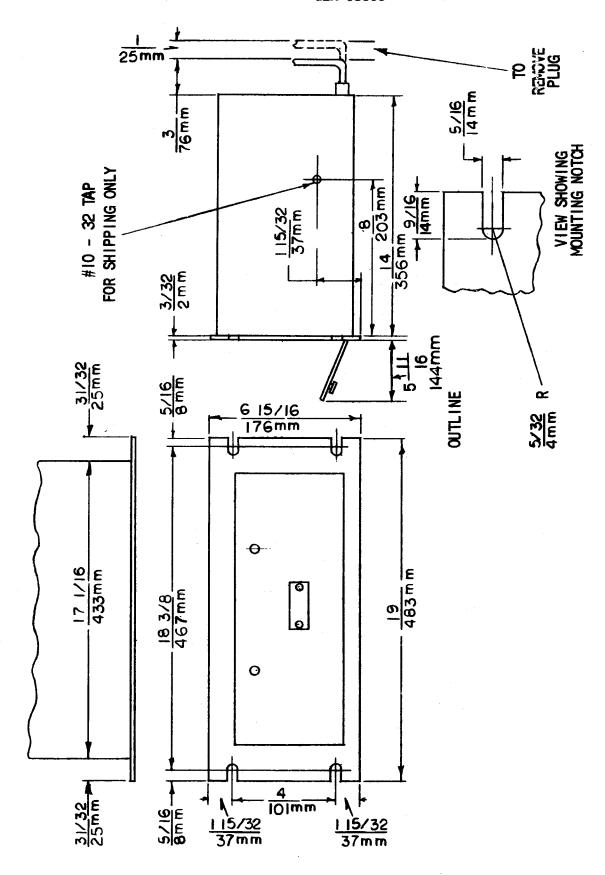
(0227A2037-0) Outline and Mounting Dimensions for the Type SLAT61J Relay
